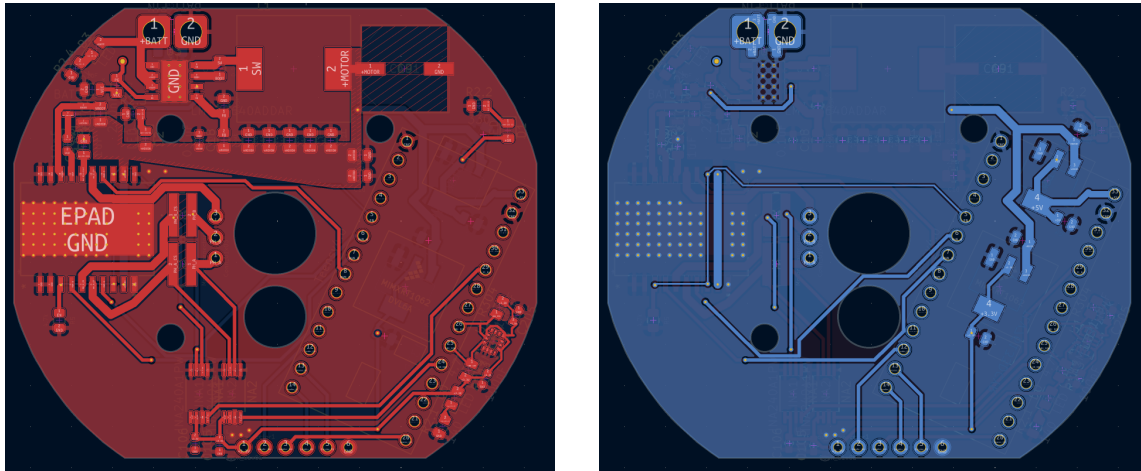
The PCB layout. The top side of the PCB is on the left and the bottom side is on the right.
